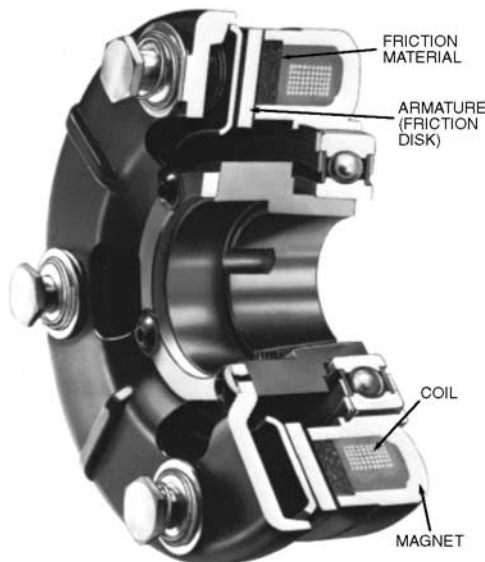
Electromagnetic friction clutches and brakes. (Warner Electric Brake and Clutch Co.)
